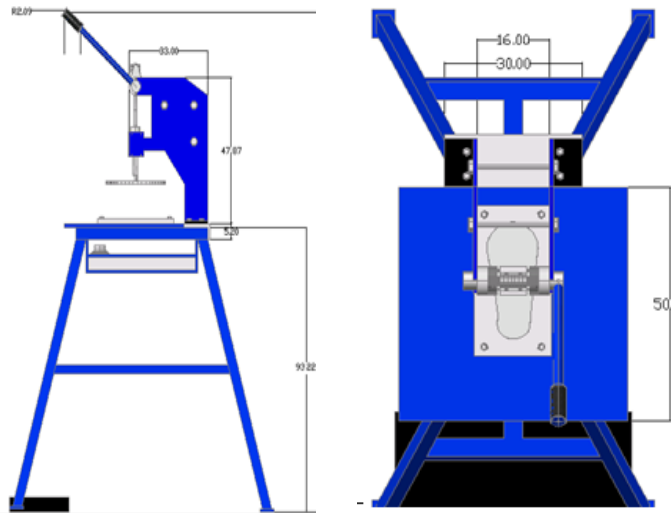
New Design of Cutting Tool of Texon Pattern (*Side and Top view*)
